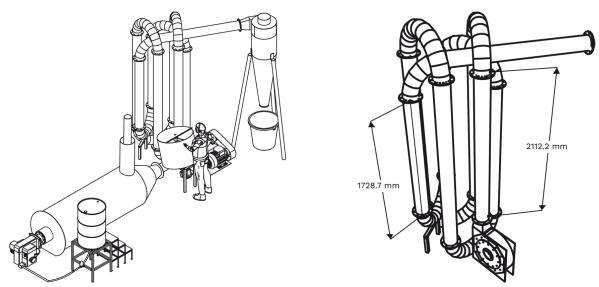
Pneumatic dryer designed with a segmented drying duct for easy installation.
